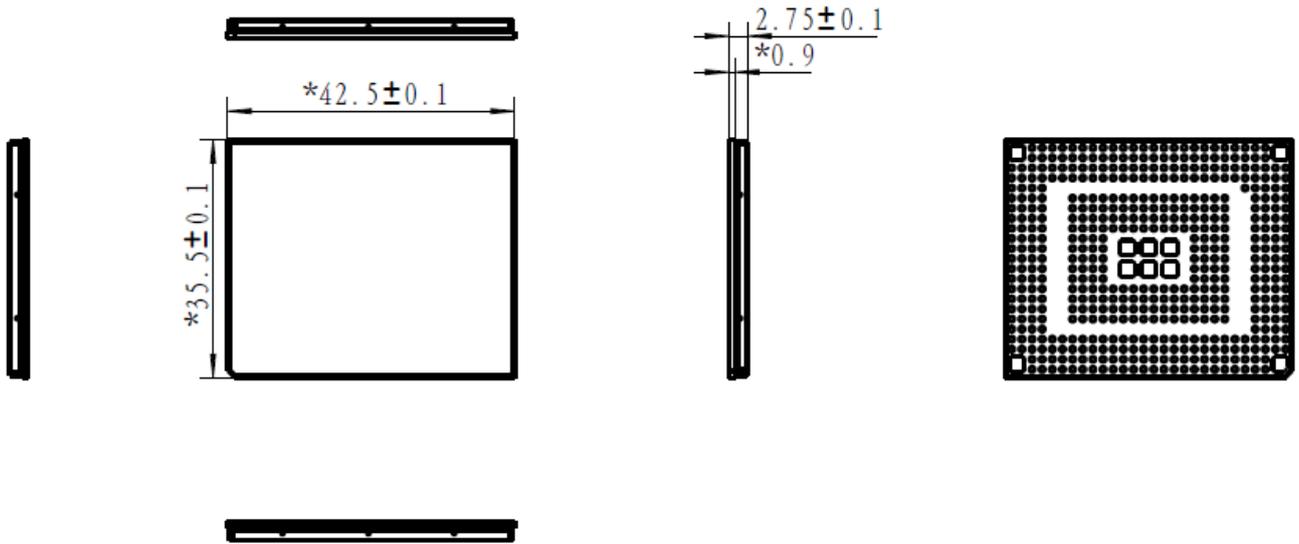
TurboX C6490 SOM Mechanical Dimensions
